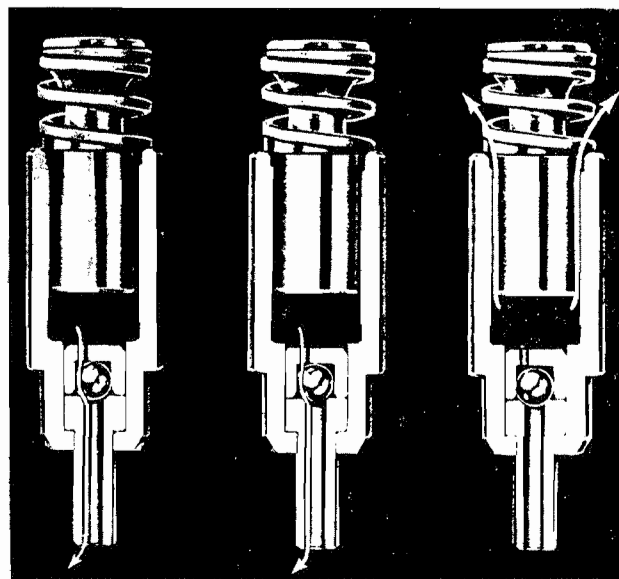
DEFECTS OF HYDRAULIC UNIT CHECK VALVE.
